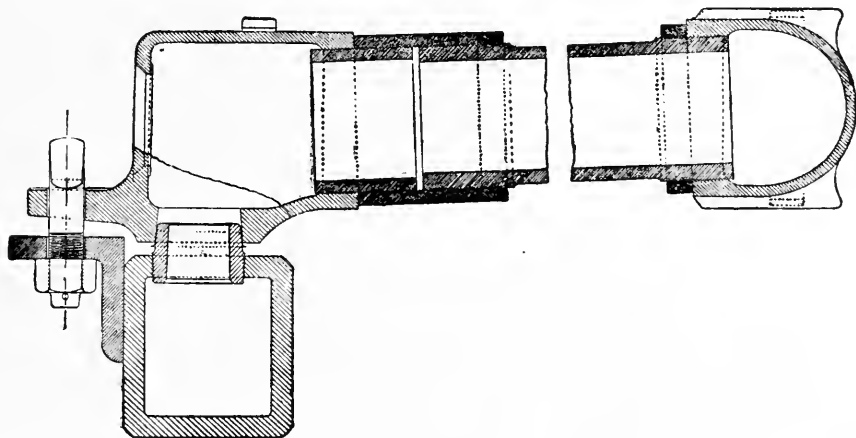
Tube and Headers of a Belleville Boiler.
